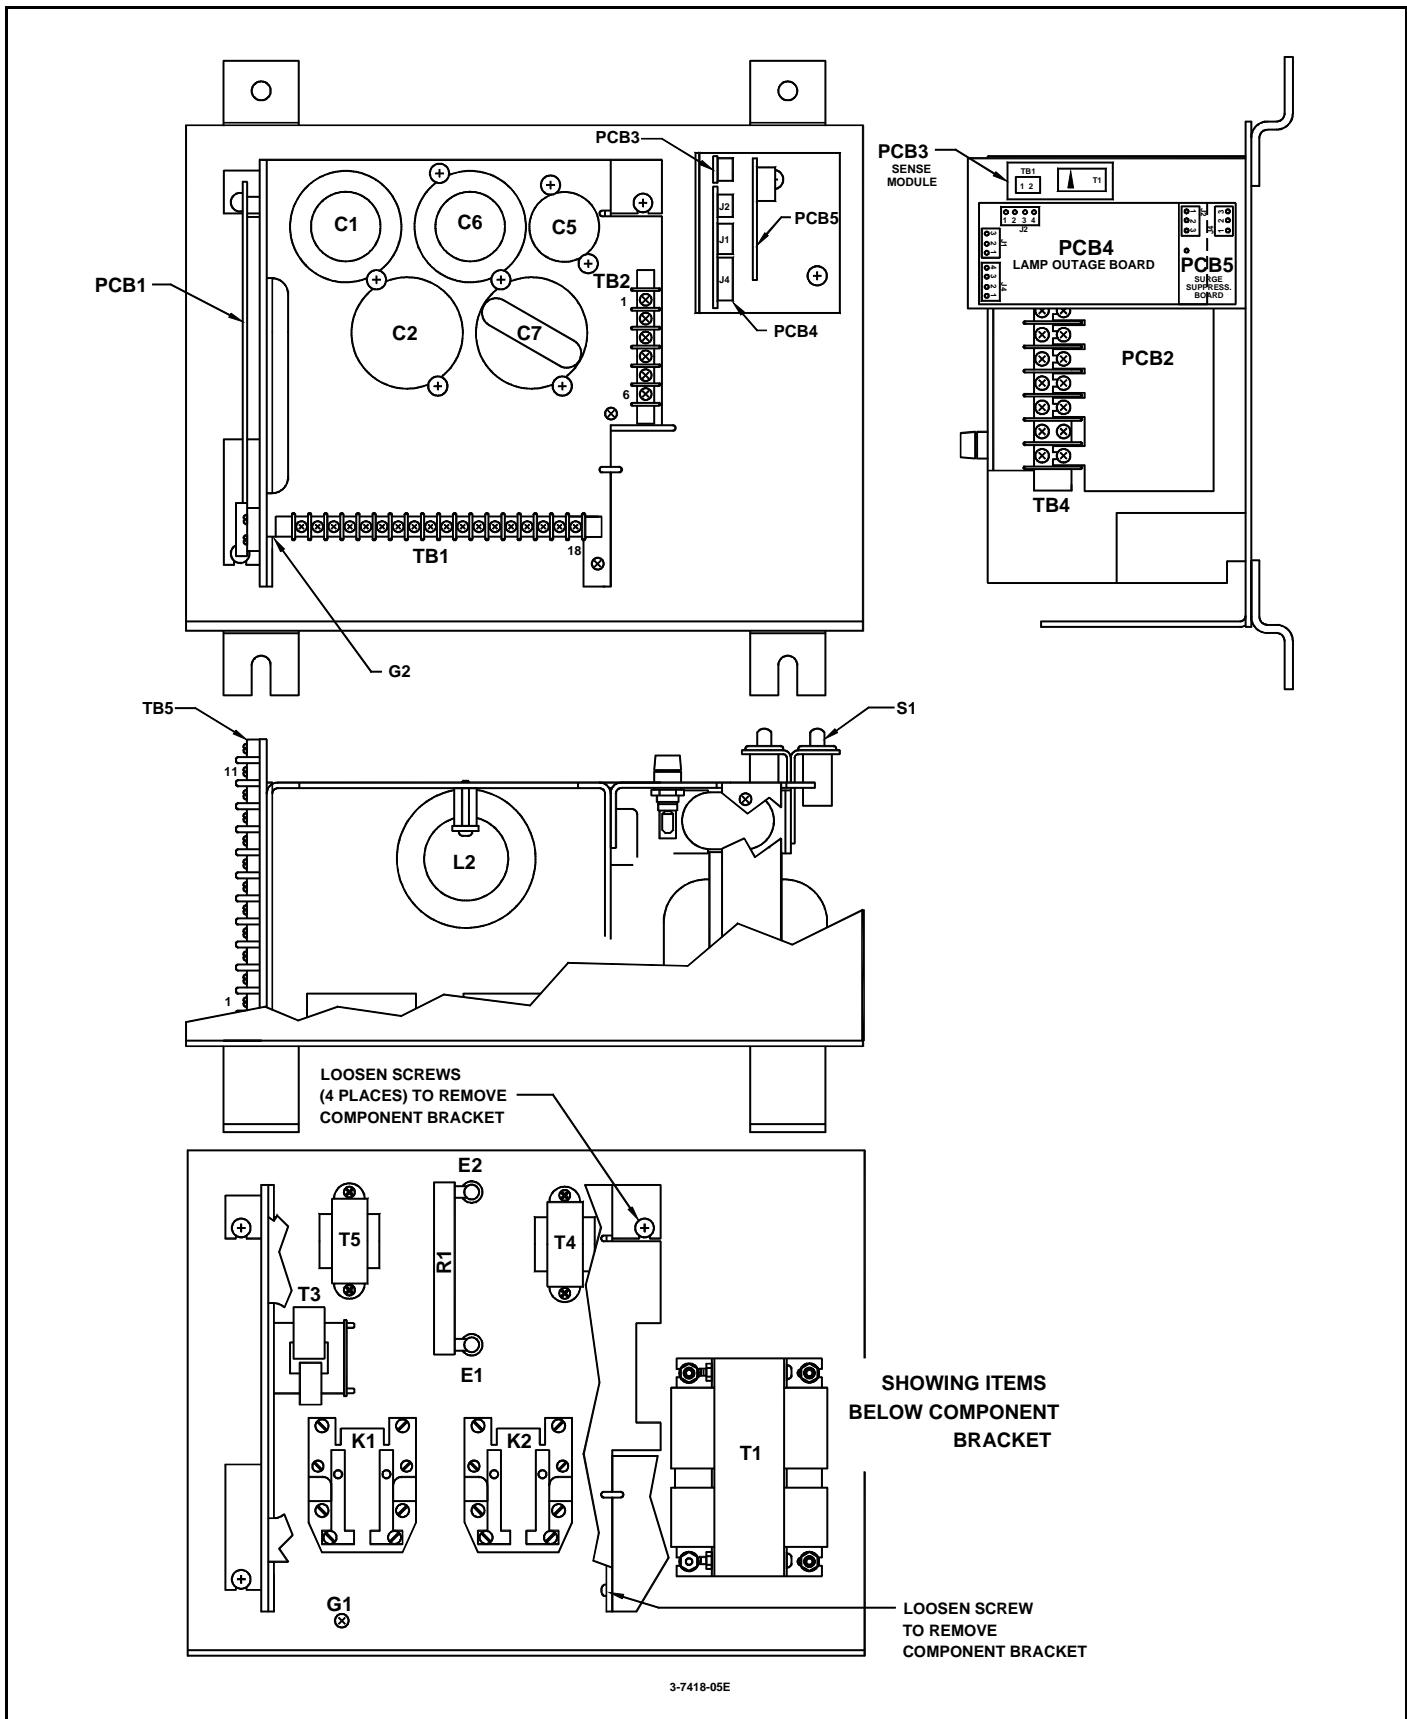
PC 430-2EN or PC 830-2EN Power Converter Internal Wiring
